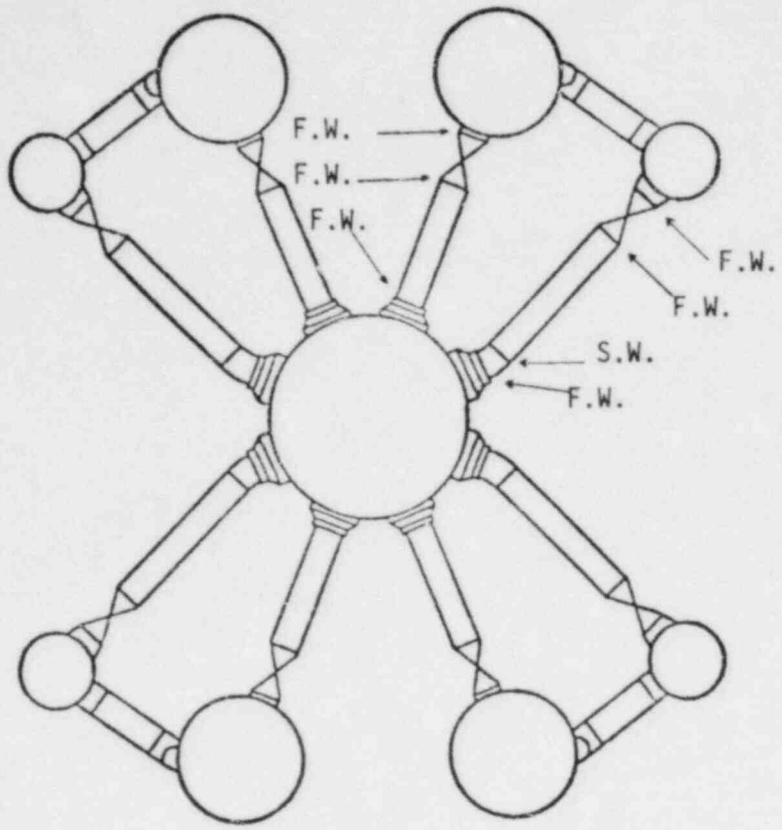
Weld Location for Haddam Neck Unit
